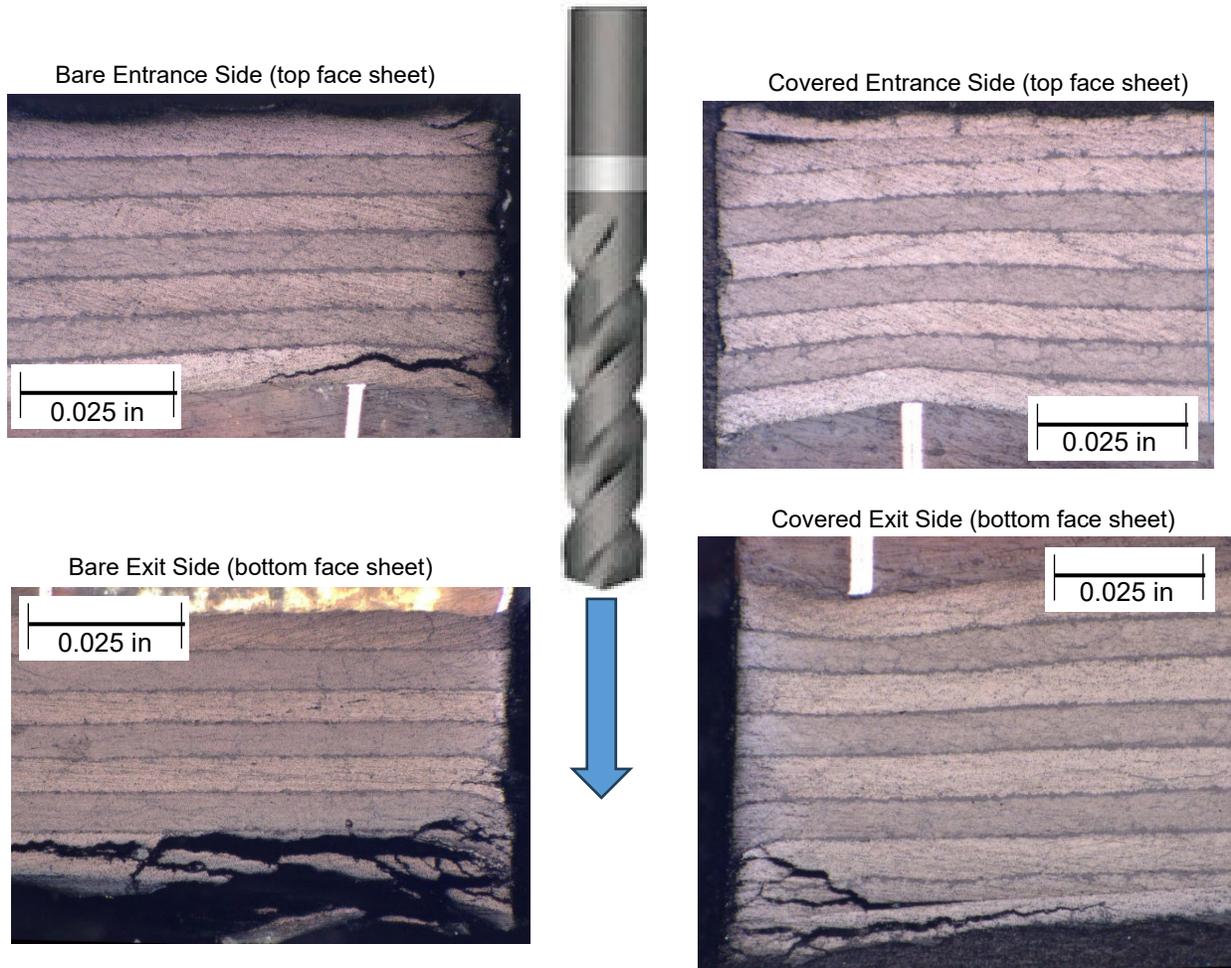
Examples of cross-sectional microscopy of holes. Cuts in 90° direction.
